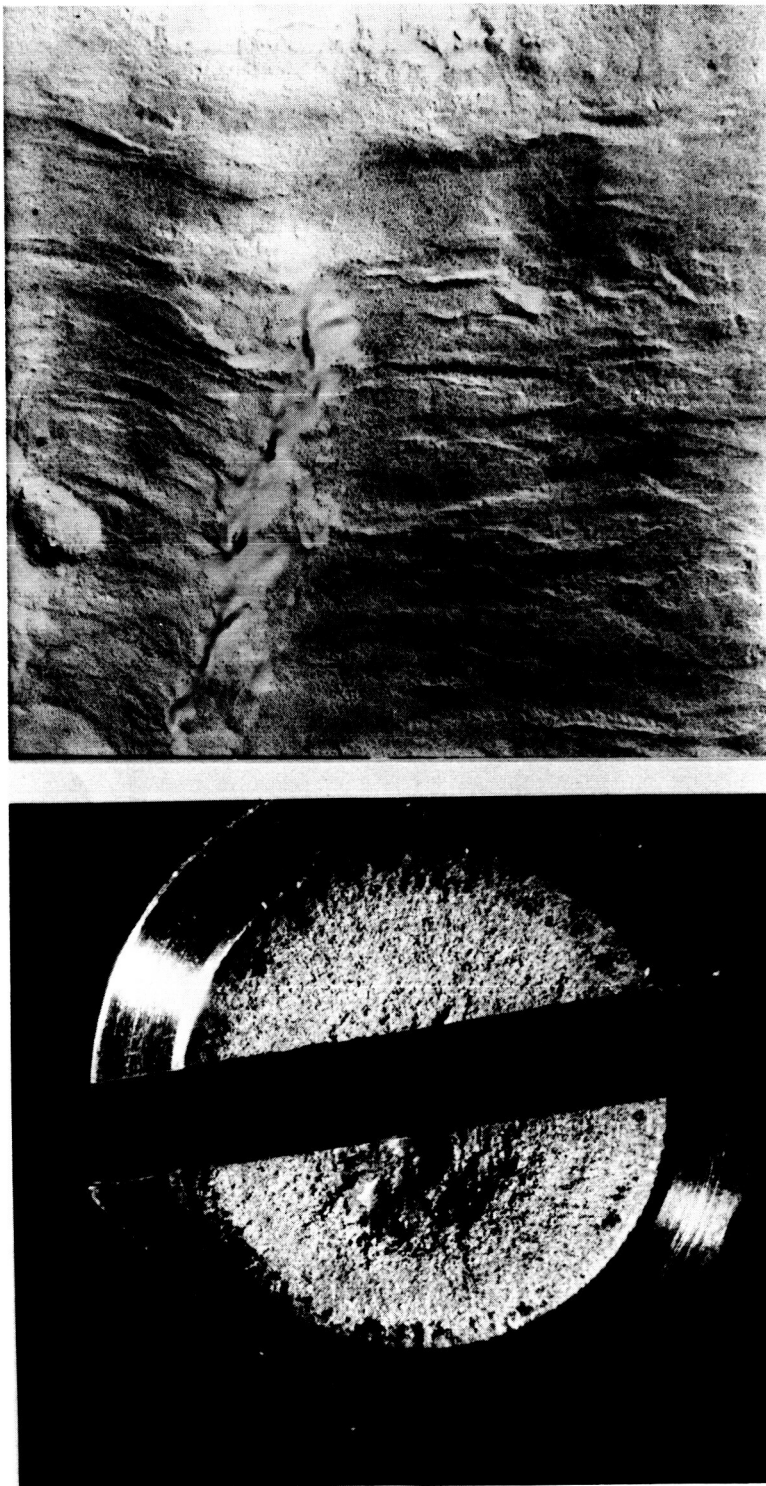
Macrograph of fracture face of tape recorder shaft at 12X (left) and electron fractograph of typical area on fracture face at 16,000X (right) both indicate fracture by fatigue crack propagation.
